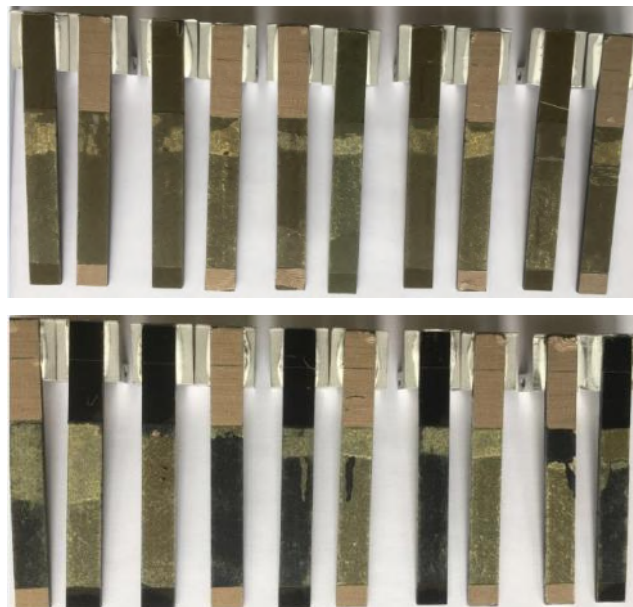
Debonding toughness samples – Fracture surfaces: a) Neat epoxy, b) COOH-MWCNT epoxy.
